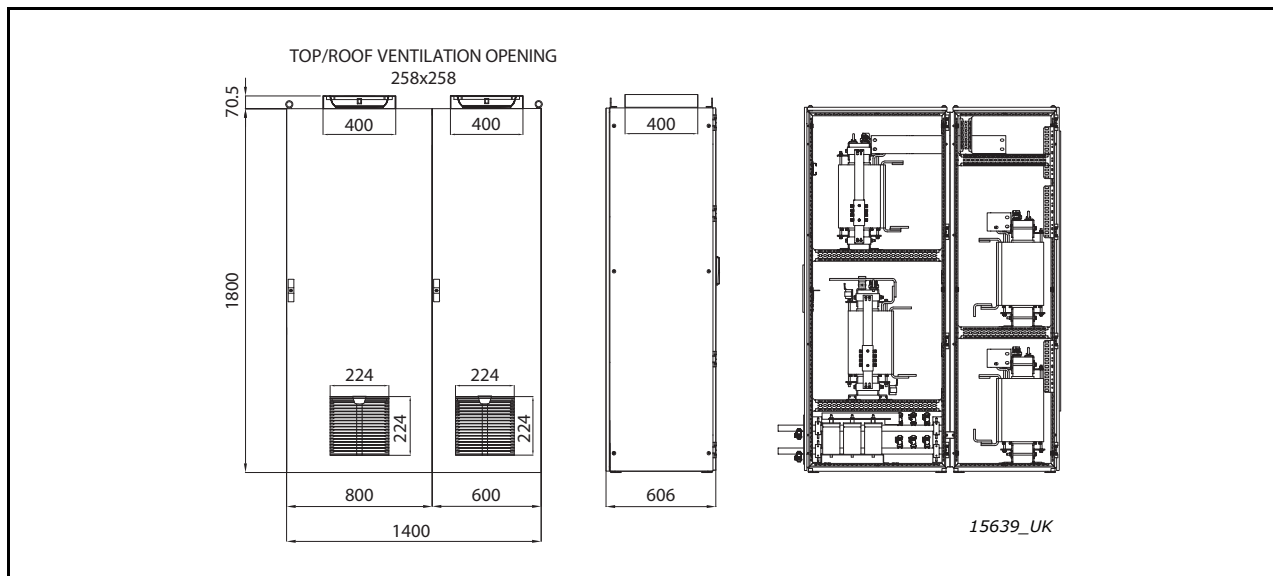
Layout of RLC 1180/1640/2300 A installed in an enclosure
